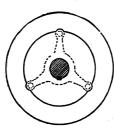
Core Discs Bolted to Spider—Bolts Placed Inside of Discs
